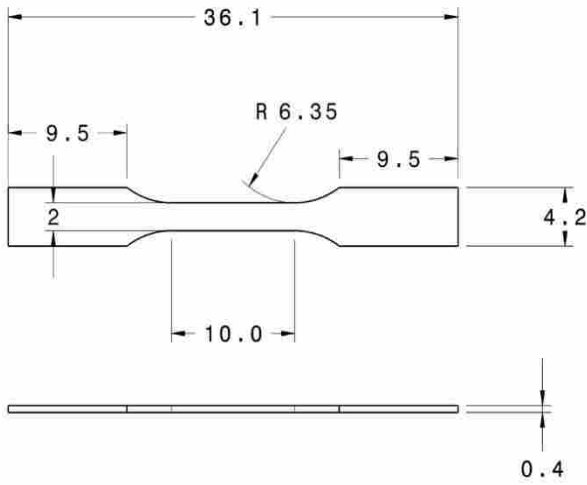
Dimensions of Dog Bone Micro-Tensile Test Specimens in mm
